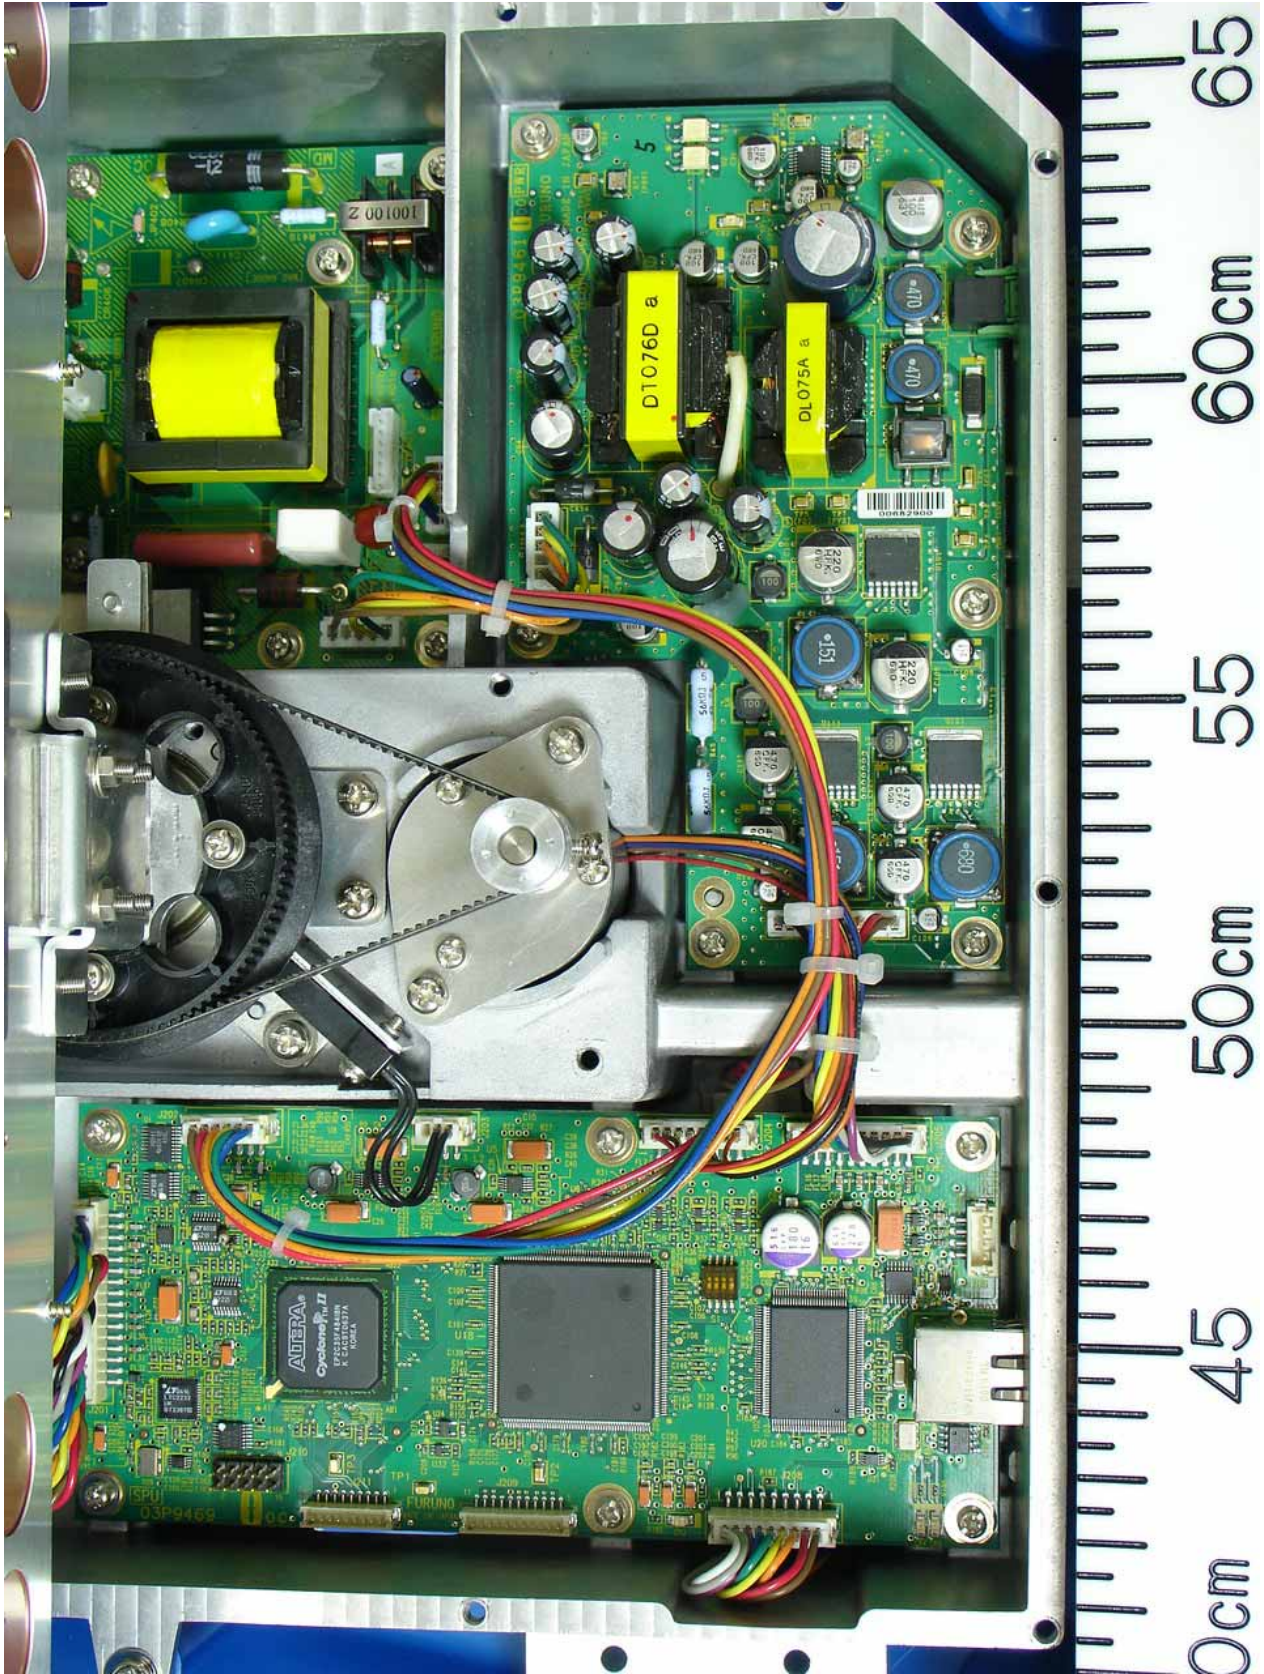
Transceiver top view with Shield-cover removed, showing SPU Board 03P9469 (left), PWR Board 03P9461 (lower right), MD Board 03P9448A (upper right) and Scanner motor (center)
